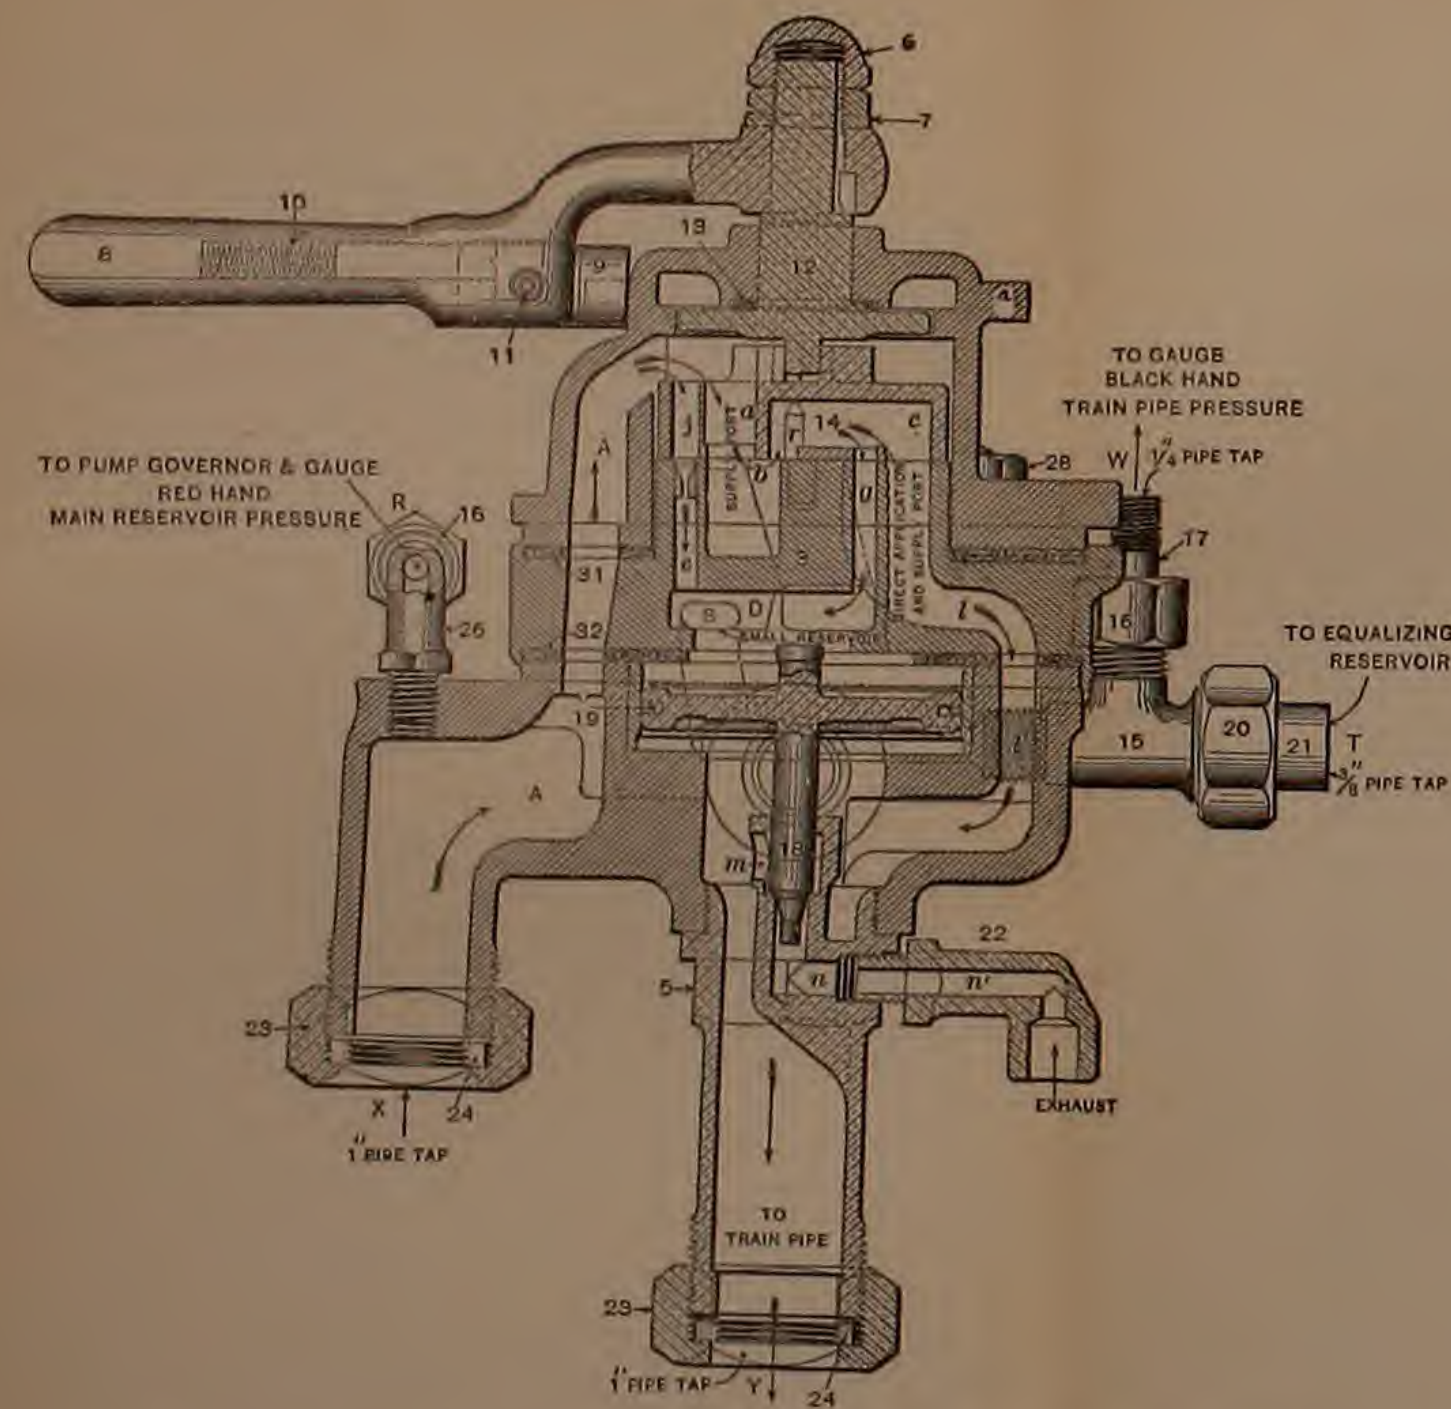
G 6 ENGINEER'S BRAKE VALVE, RELEASE POSITION.
